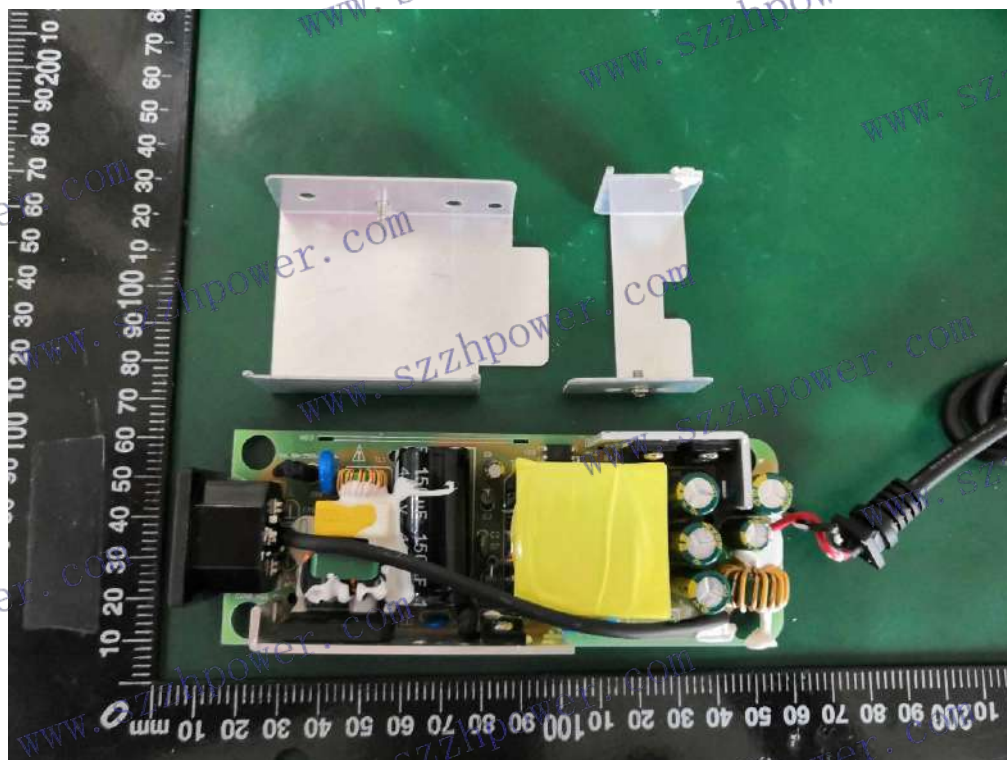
Top view of PCB for models ZH100DU-xxxxyyy, KS100DU-xxxxyyy
